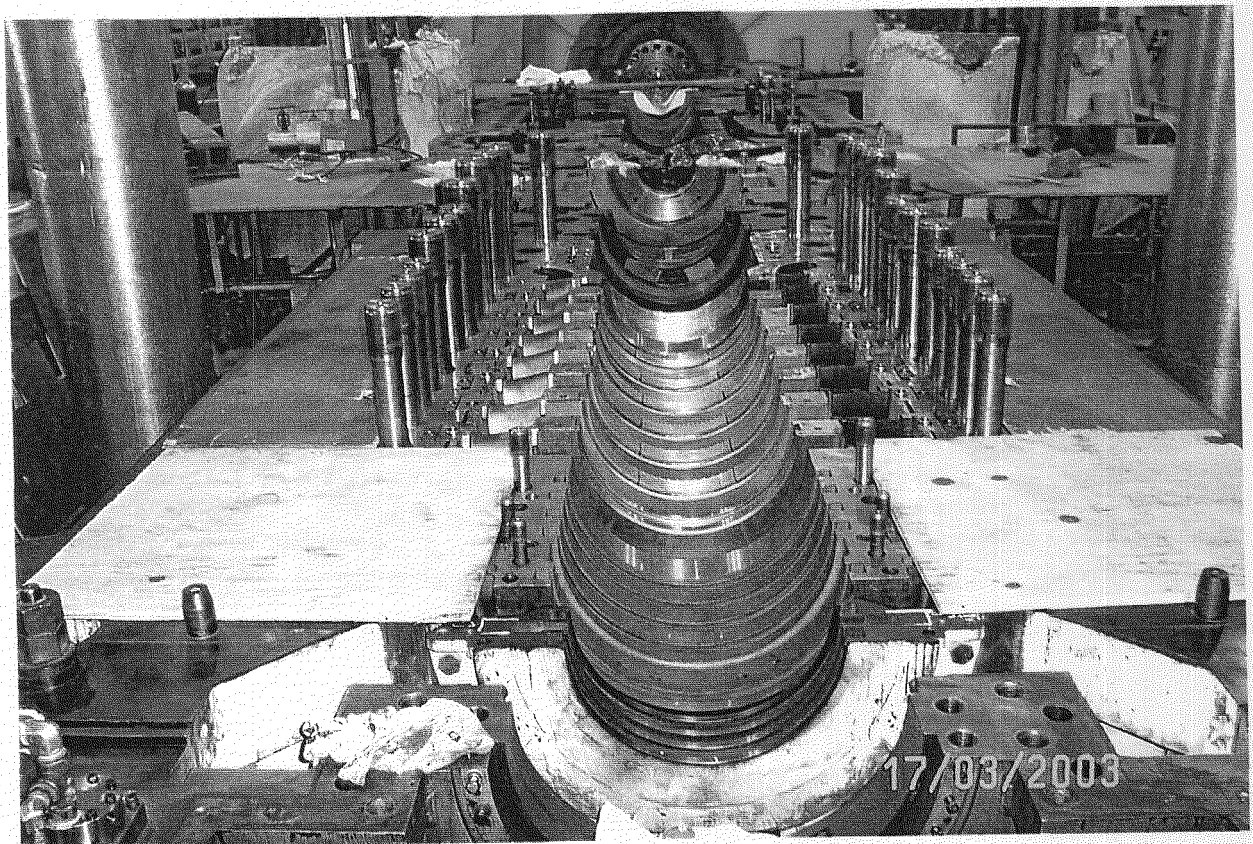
HP REAR BEARING T2 (RE-USED)
